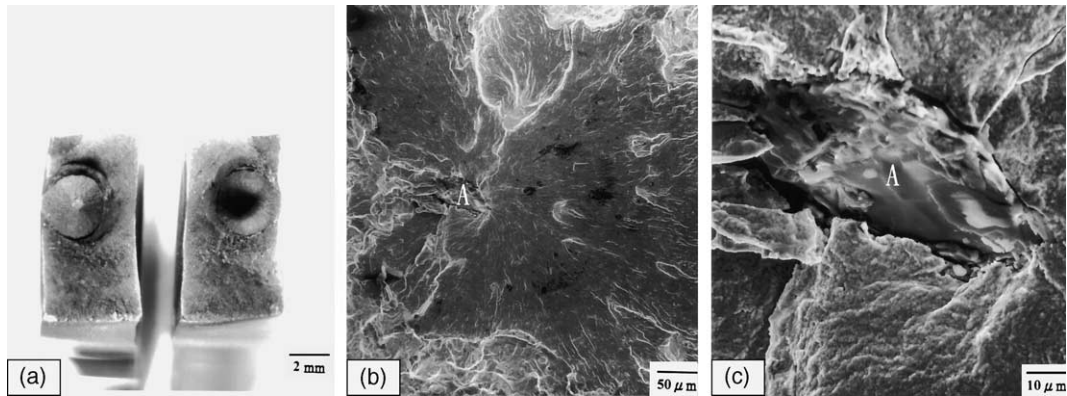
Fatigue fracture surface of the I2 specimen at 300 °C: (a) overview of fracture surface, (b) fatigue crack initiated at inclusions and (c) inclusions at a higher magnification (A = inclusion).
